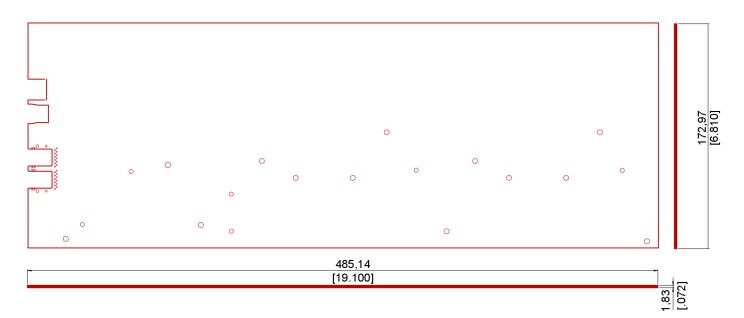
Intel[®] Server Board S2600BP Product Family Board Dimensions
